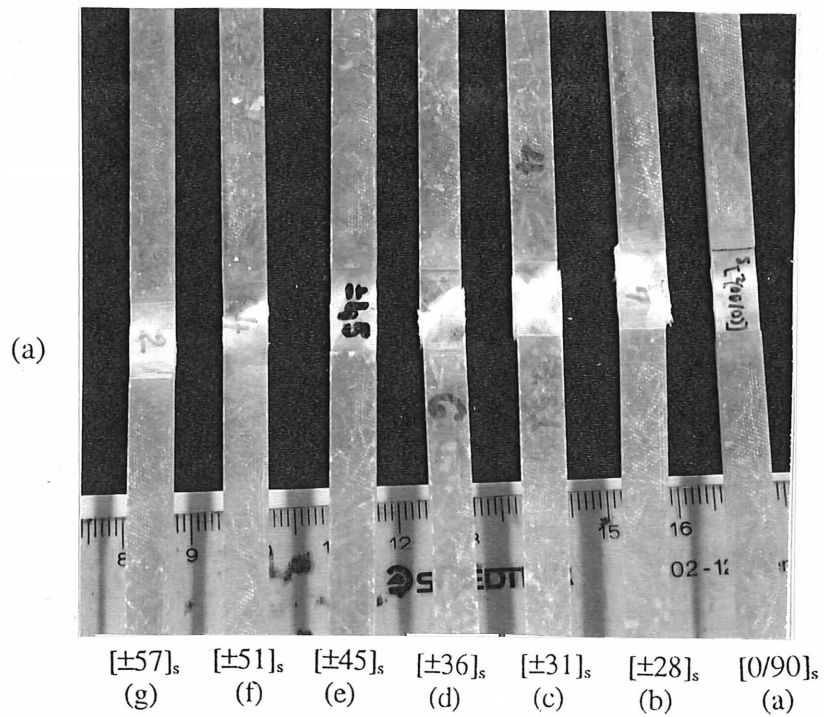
Photographs of the typical compressive failures of the specimens made of plain weave fabric composite
